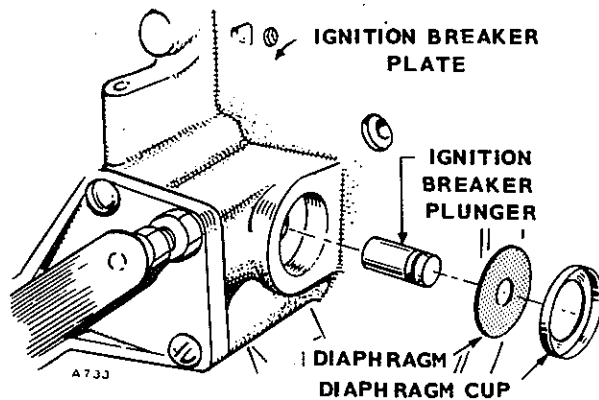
BREAKER PLATE ASSEMBLY
